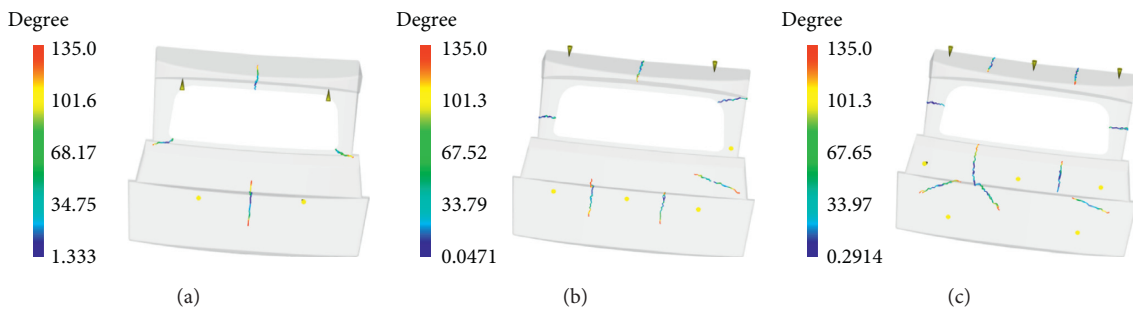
Welding line with (a) four gates, (b) six gates, and (c) eight gates.
